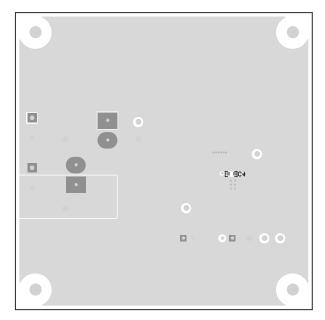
TPS54340-Q1EVM-593 Bottom-Side Assembly and Silkscreen (Viewed From Top)
